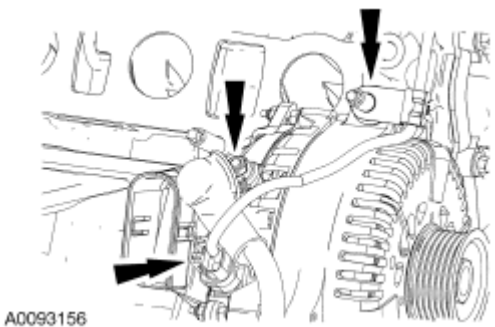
Locating Generator Electrical Connections And Wiring Harness Retainer
